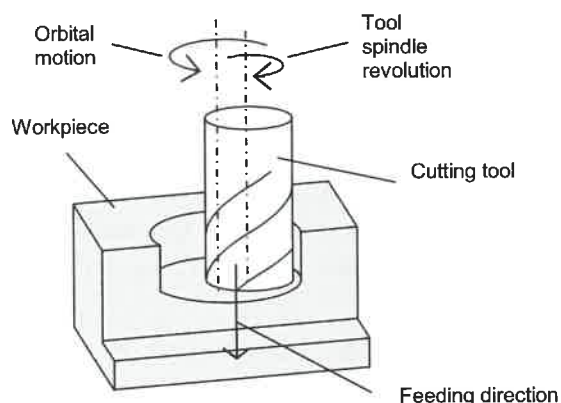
Cutting tool motion in orbital drilling/helical milling
